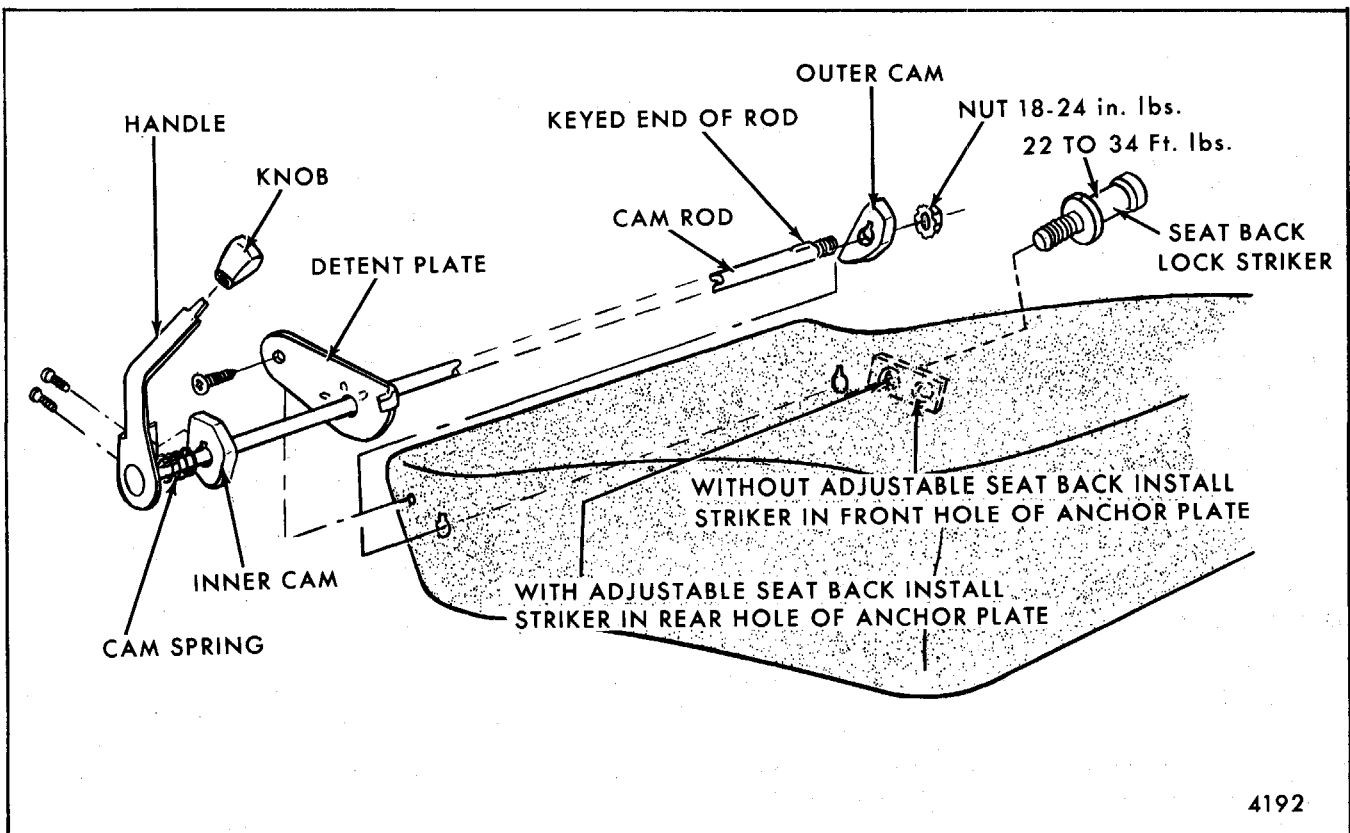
Adjustable Driver's Seat Back Handle, Cams, Cam Rod, Detent Plate and Spring Removal and Installation from Seat Cushion - Chevrolet "F and H" Styles
